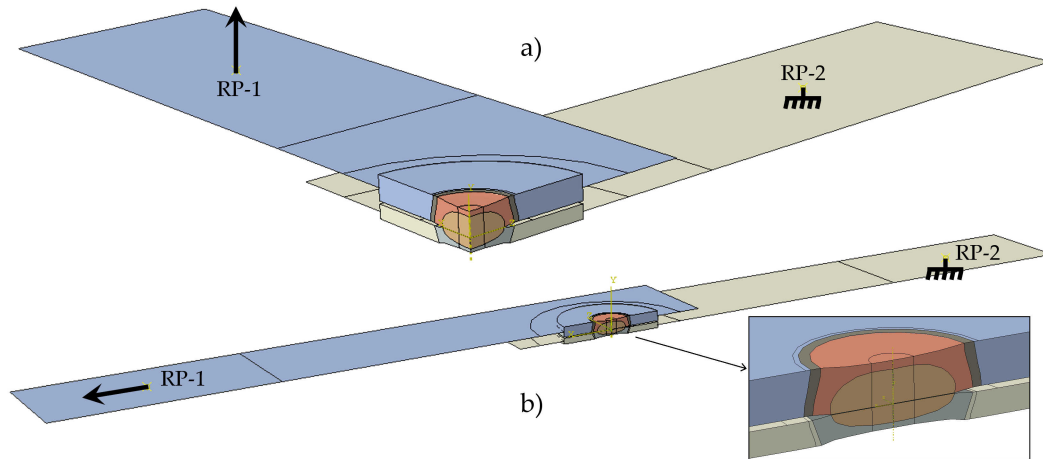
Minimal symmetry of heterogeneous spot weld mechanical tests with the loading conditions: a) spot weld quarter in cross section and b) half spot weld in tensile shear.
